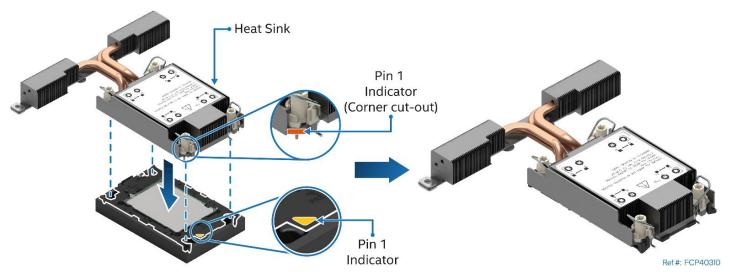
Pin 1 Indicator of Processor Carrier Clip
